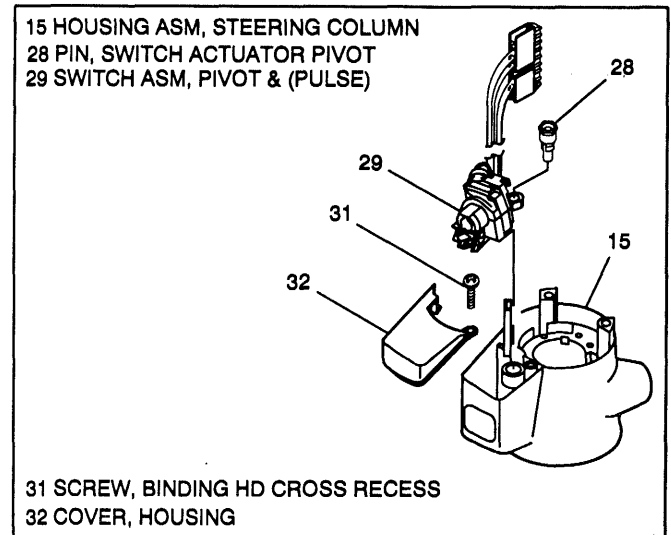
Removing Pivot & (pulse) Switch Assembly
